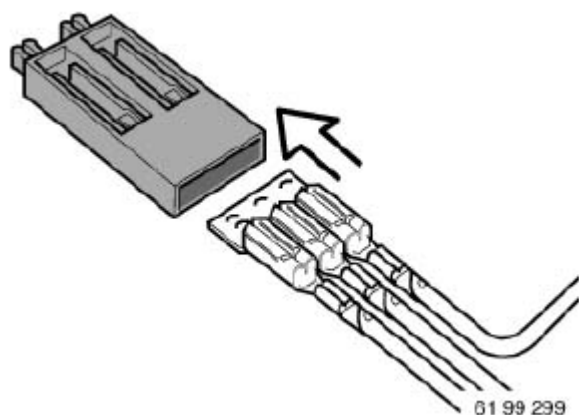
Sliding Assembled Fan Connector Into Insulation Housing
